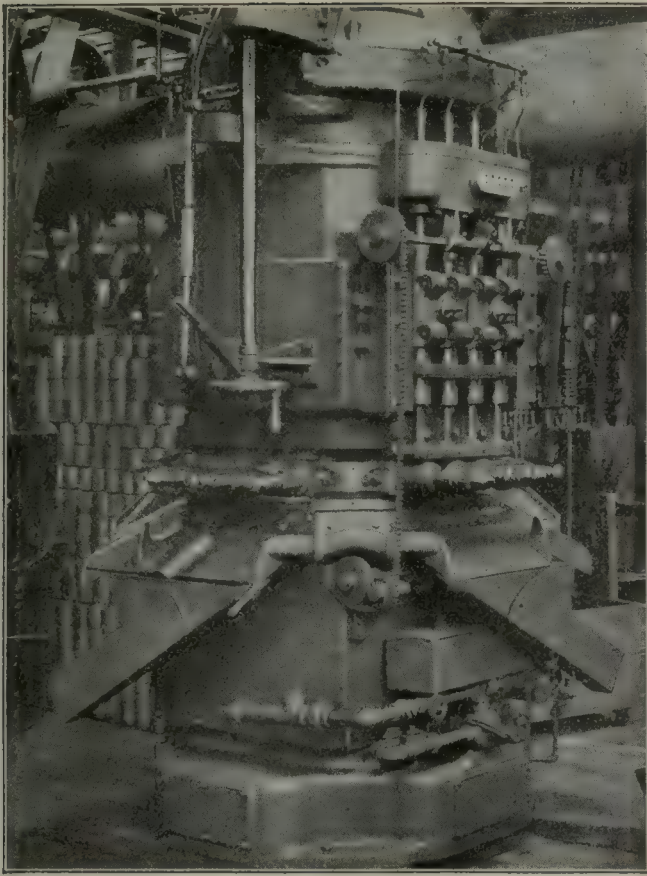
SPECIAL MACHINE FOR PISTON-PIN HOLE
